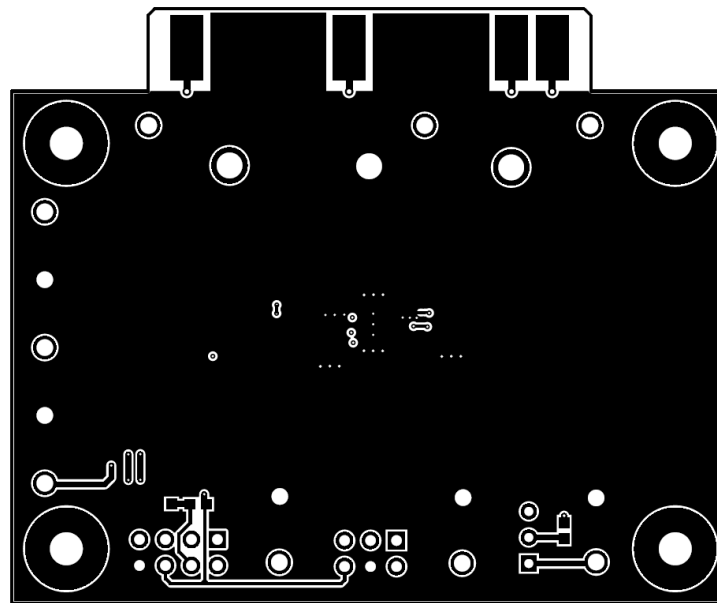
Fixed Output Board Layout - Bottom Layer Copper
